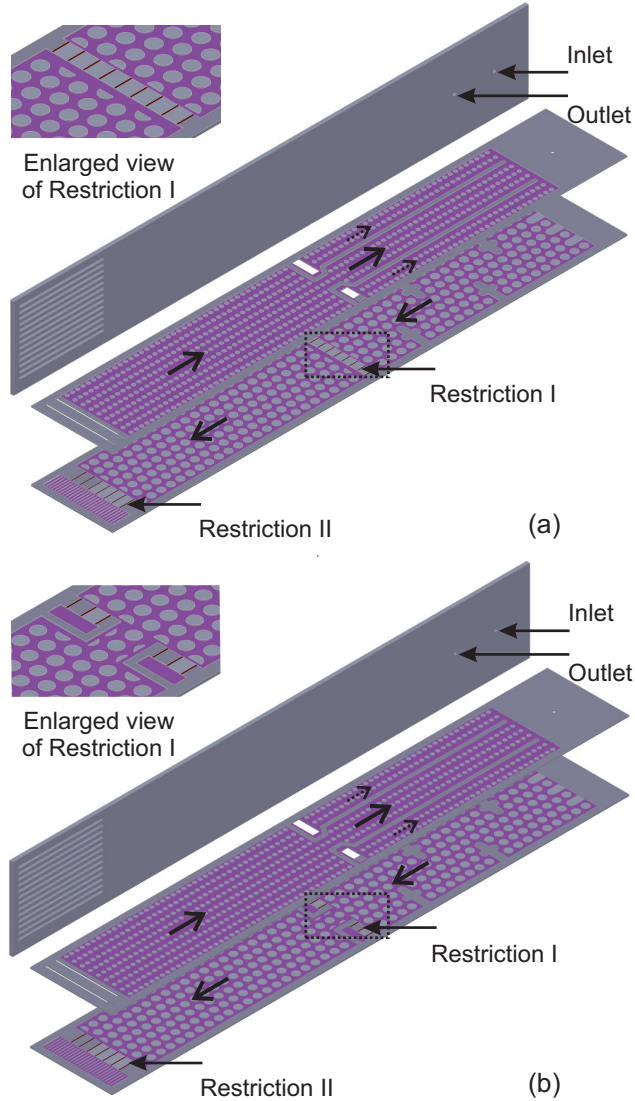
Exploded view of the JT-cooler with double expansion.
